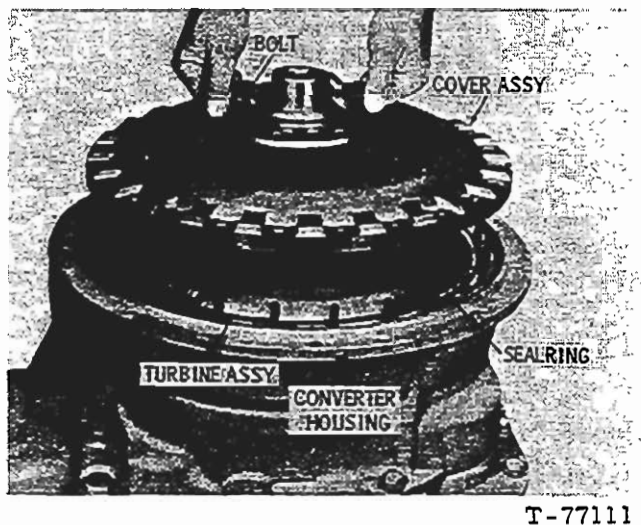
INSTALLING TORQUE CONVERTER DRIVE COVER - DIRECT MOUNT
